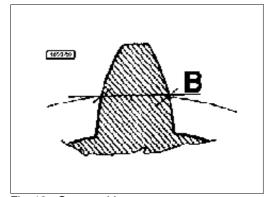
Gear toothing. B - Gear tooth thickness
